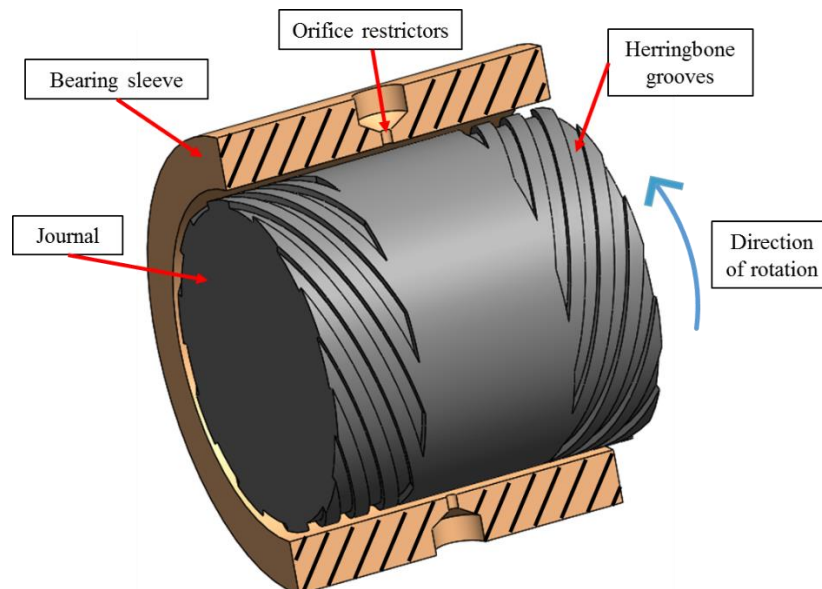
A proposed hybrid journal air bearing. The stationary bearing sleeve is presented in cross section view to show orifice restrictors, which are used to supply compressed air when rotational speed is zero or low.
